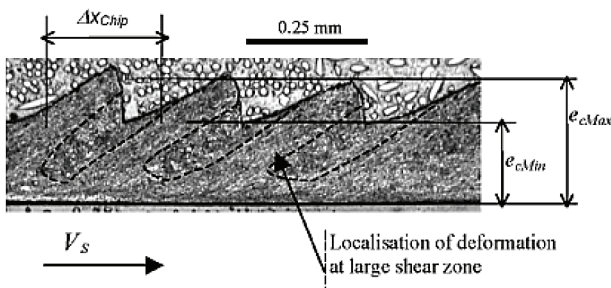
Saw-tooth chip geometry of machined AISI 4340 (47 HRC) ( $V_c = 120$  m/min;  $f = 0.2$  mm/rev).
